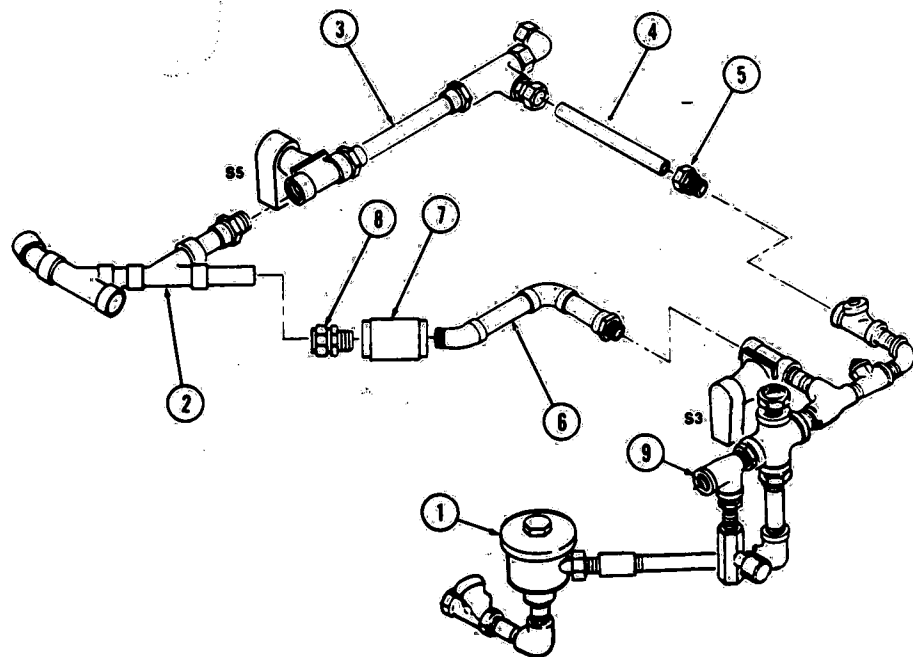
LOWER PIPING ASSEMBLY - Gravity
